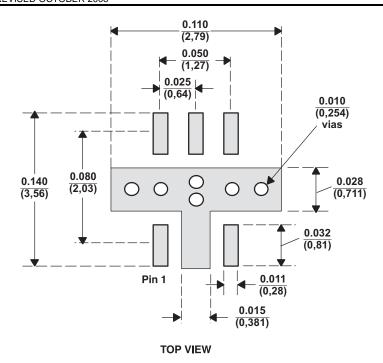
THS9000 Recommended Footprint dimensions are in inches (millimeters)
